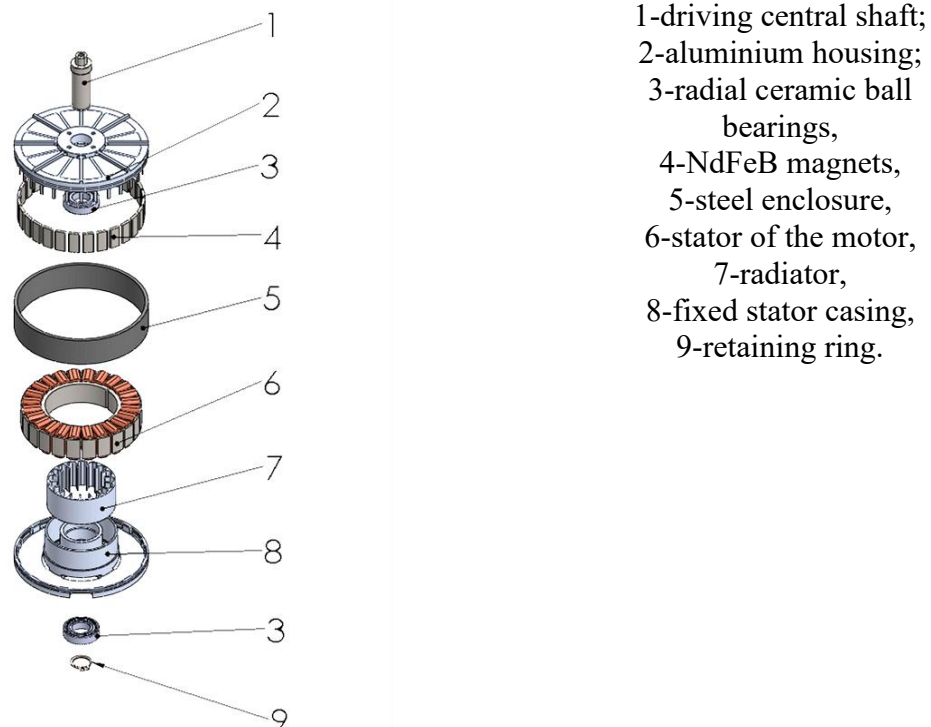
An exploded 3D view of the Brushless DC (BLDC) motor for lightweight aerial platforms.
